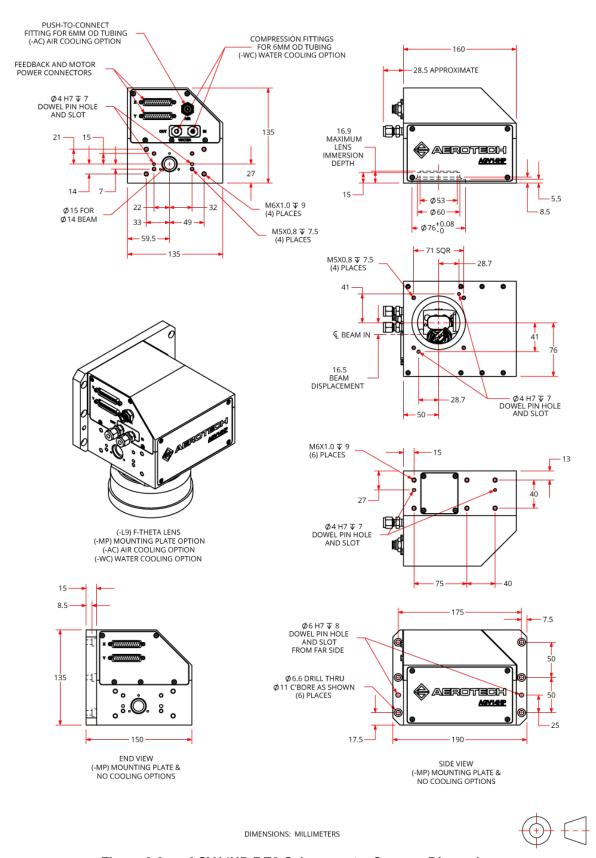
AGV14HP-BE2 Galvanometer Scanner Dimensions
